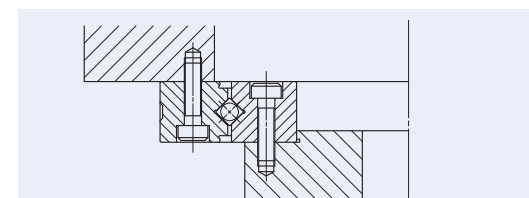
Example of direct mounting to the mating surface of Mounting Holed Type High Rigidity Crossed Roller Bearings V
